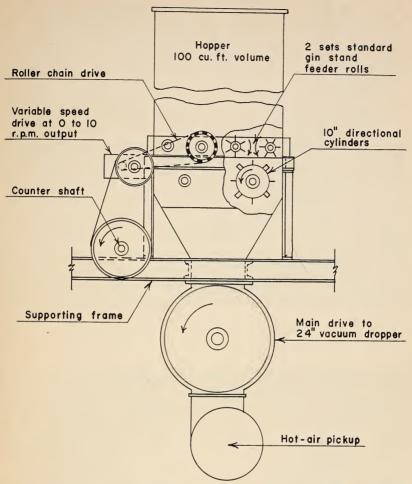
Construction details of USDA-designed automatic feed-control unit (right-hand elevation).
